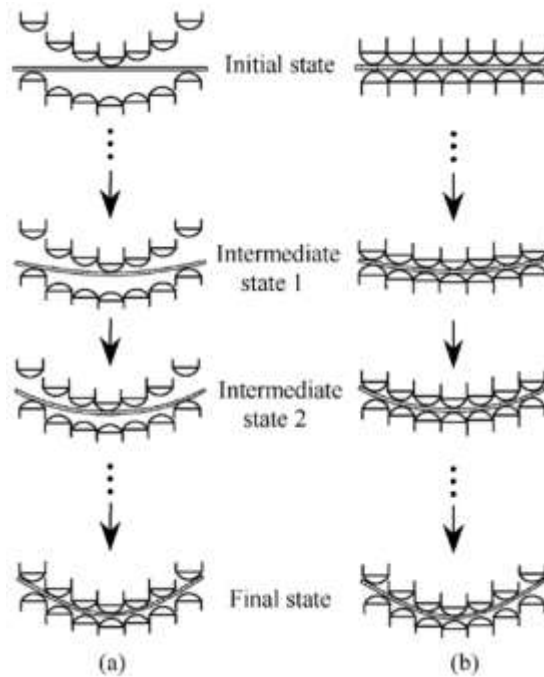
Forming paths a- Multipoint forming die b- multi-point press forming [1]
